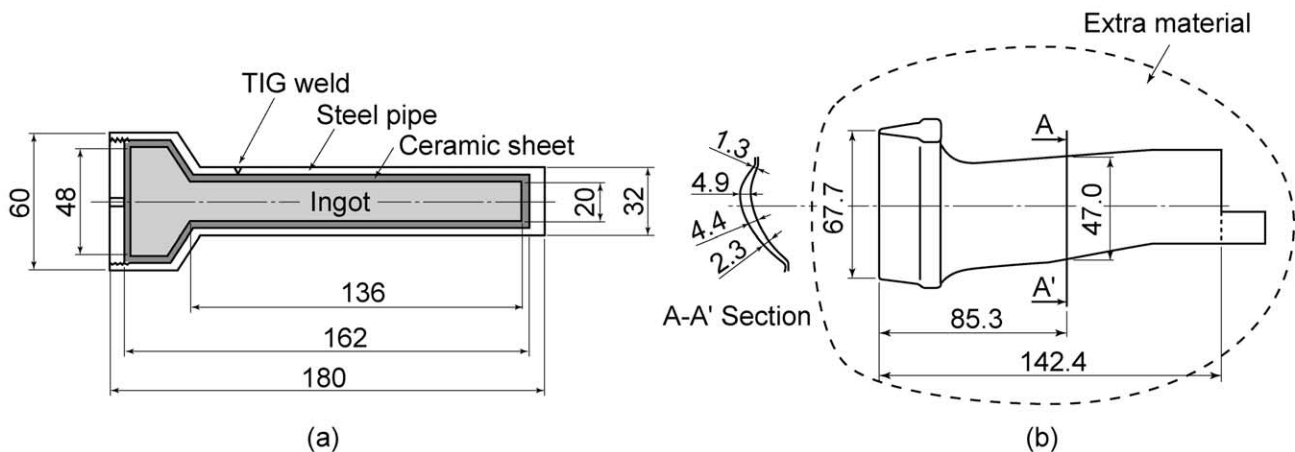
Schematic illustrations of closed-die forging test samples, (a) before the test, (b) afterwards.
